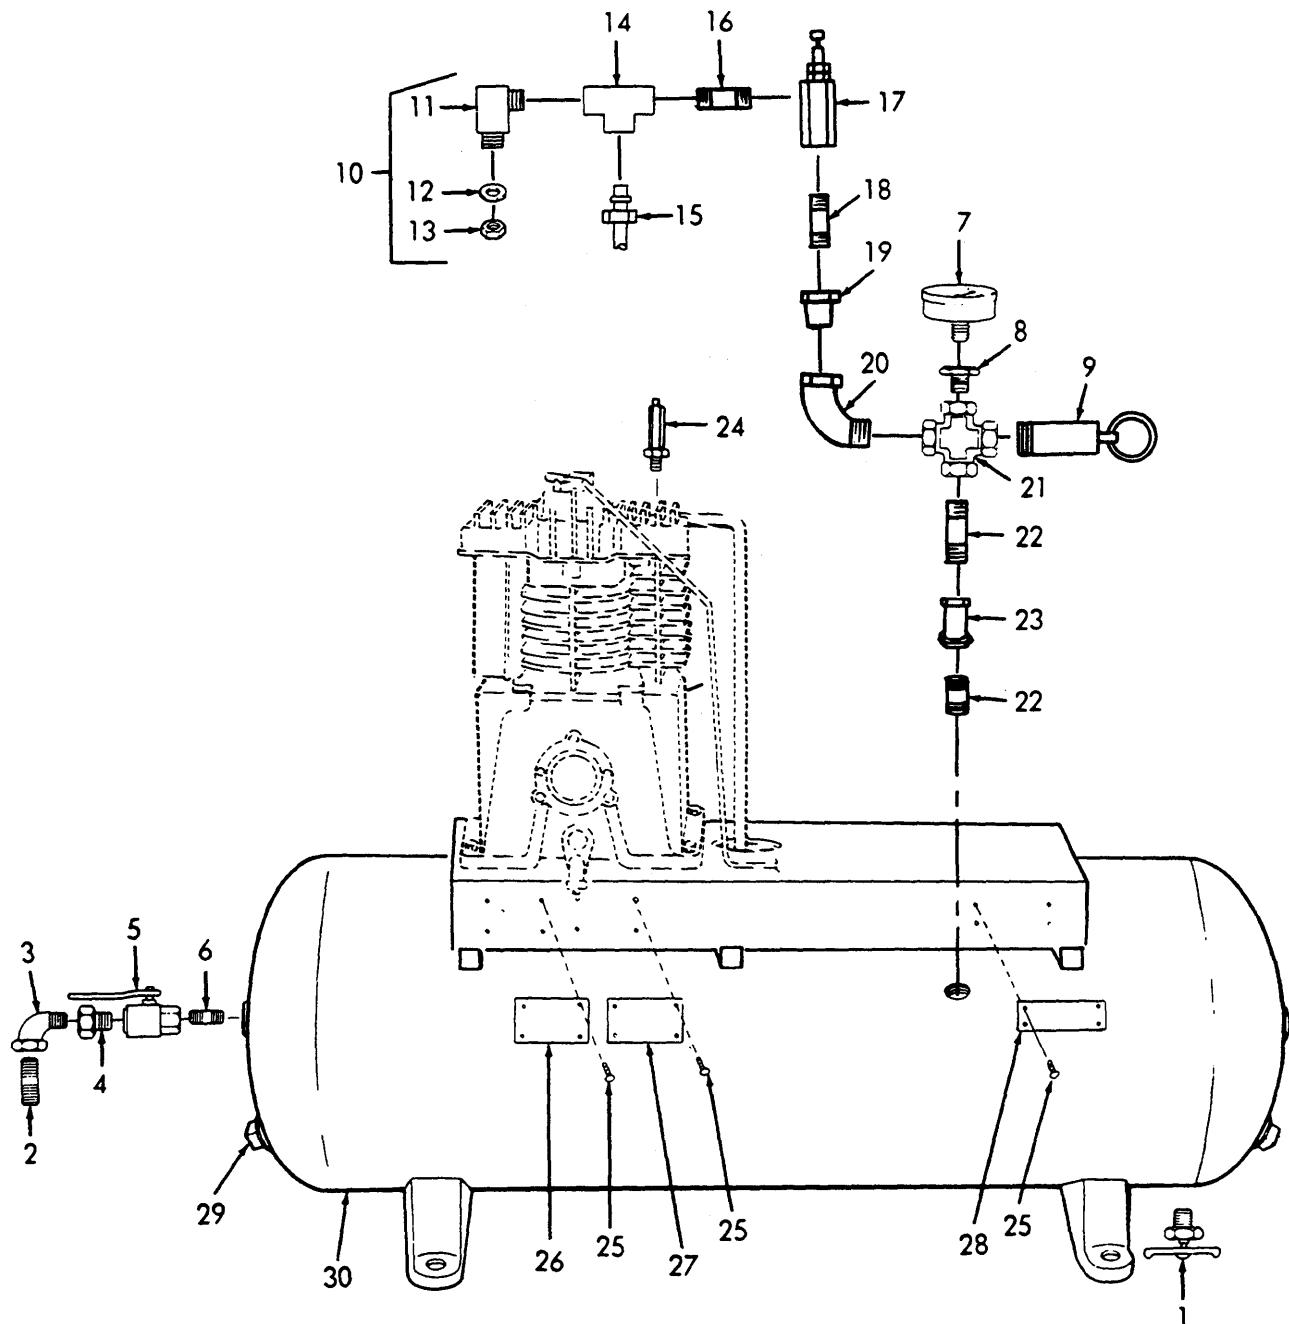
Relief Valves, Air Gage, Drain Cock, Air Valve (Tank), and Air Tank.
